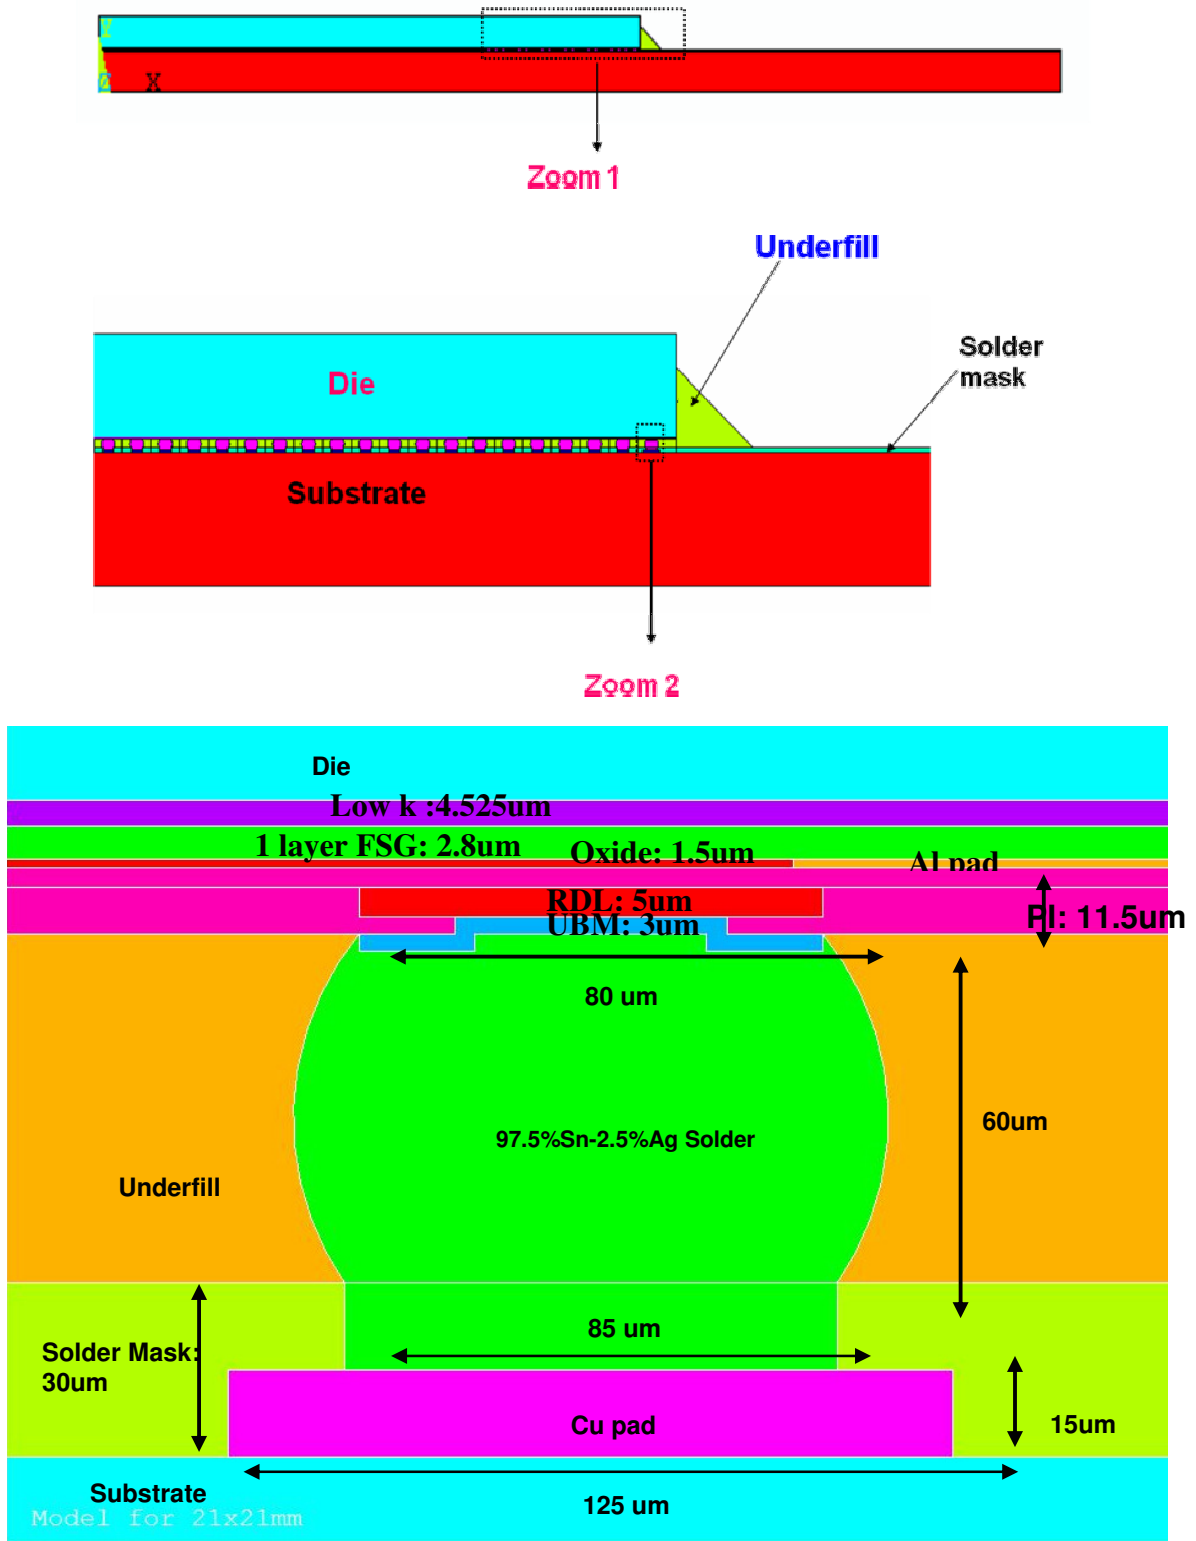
Cross-section of the 21 mm x 21 mm test vehicle with FSG layer.
